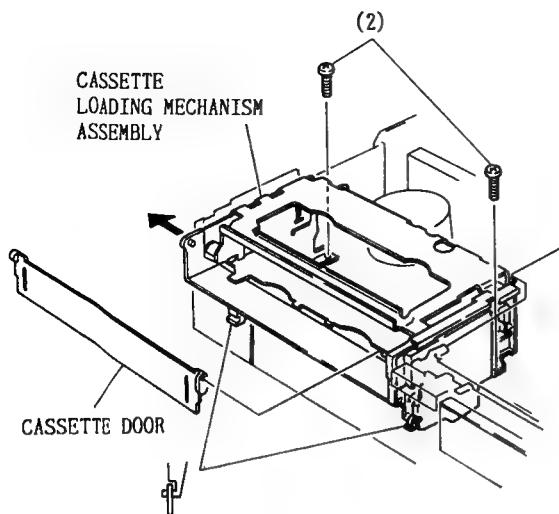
Cassette Loading Mechanism Assembly and Cassette Door
